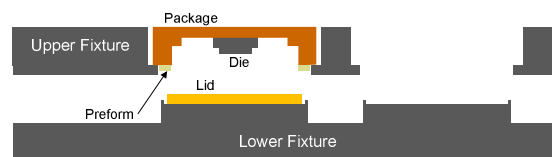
Schematic Cross-Section of Fixture and Package Assembly
